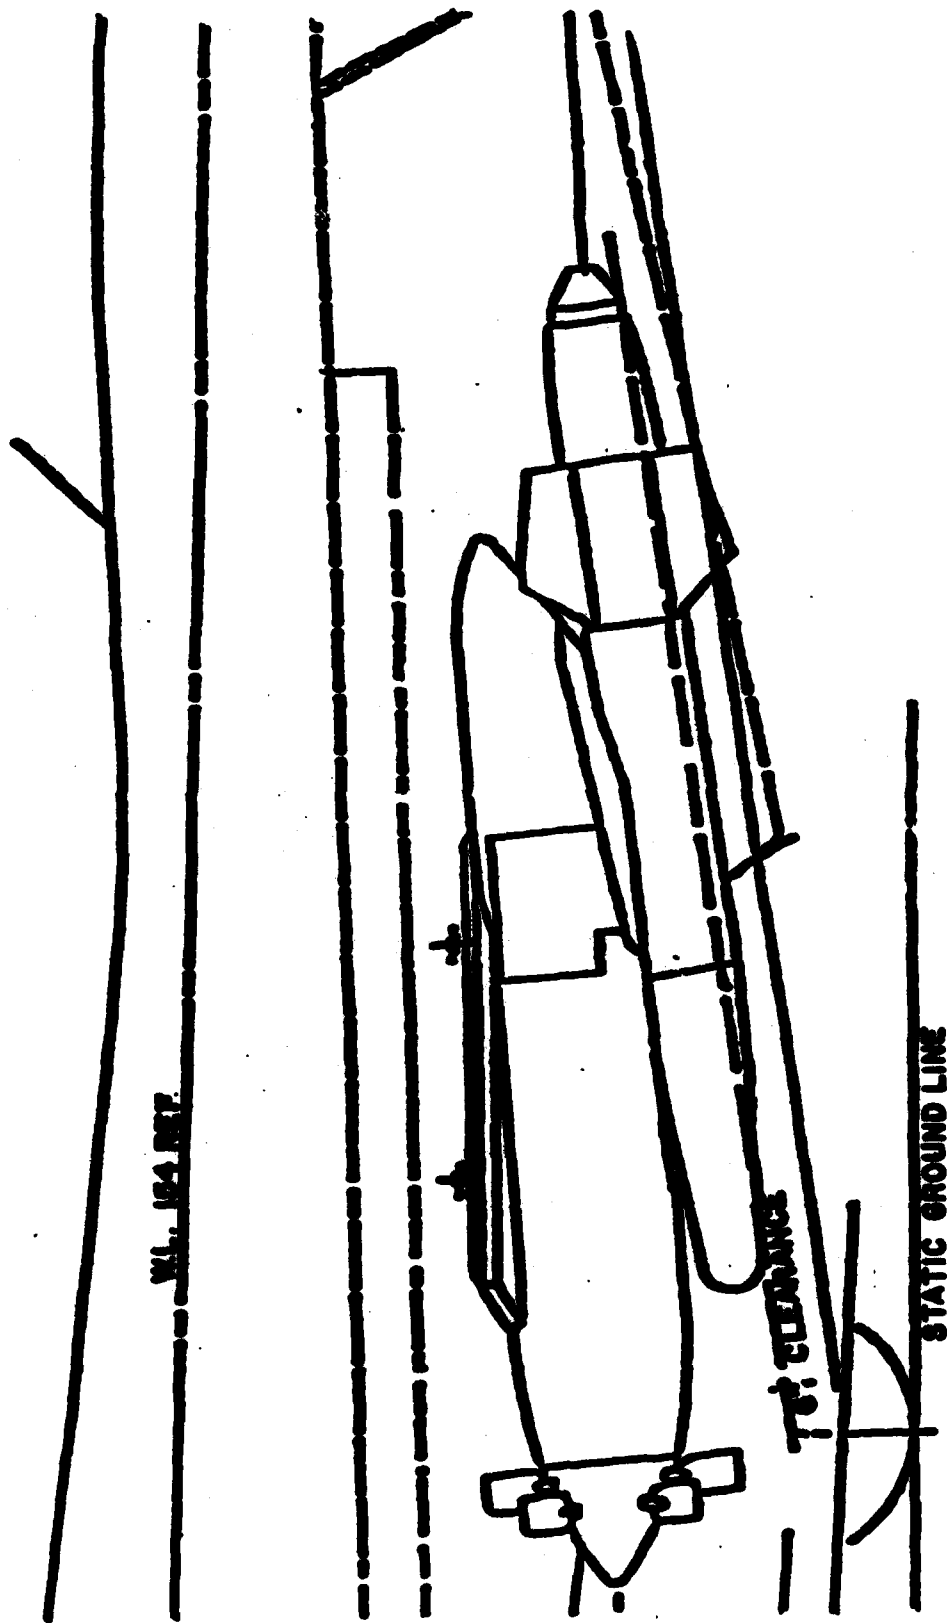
F-14 NSTTS INSTALLATION, SIDE VIEW
